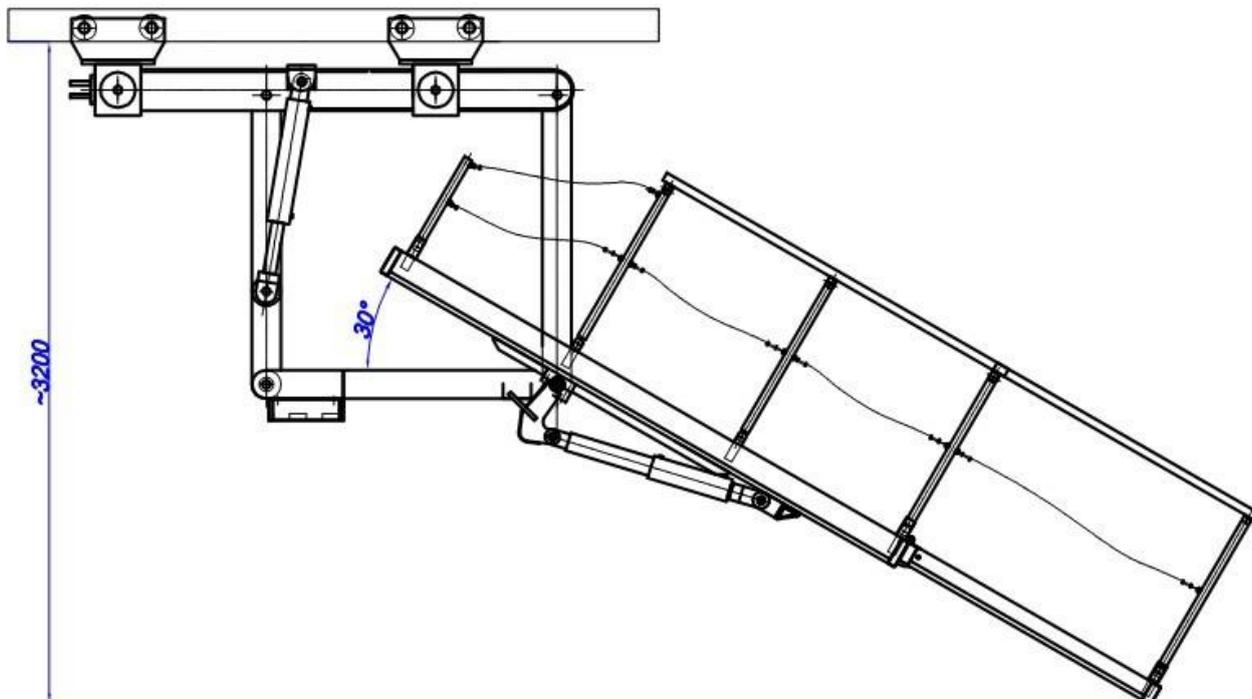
Rail assembly kit, ZM1 type – working platform in the lowered position.
